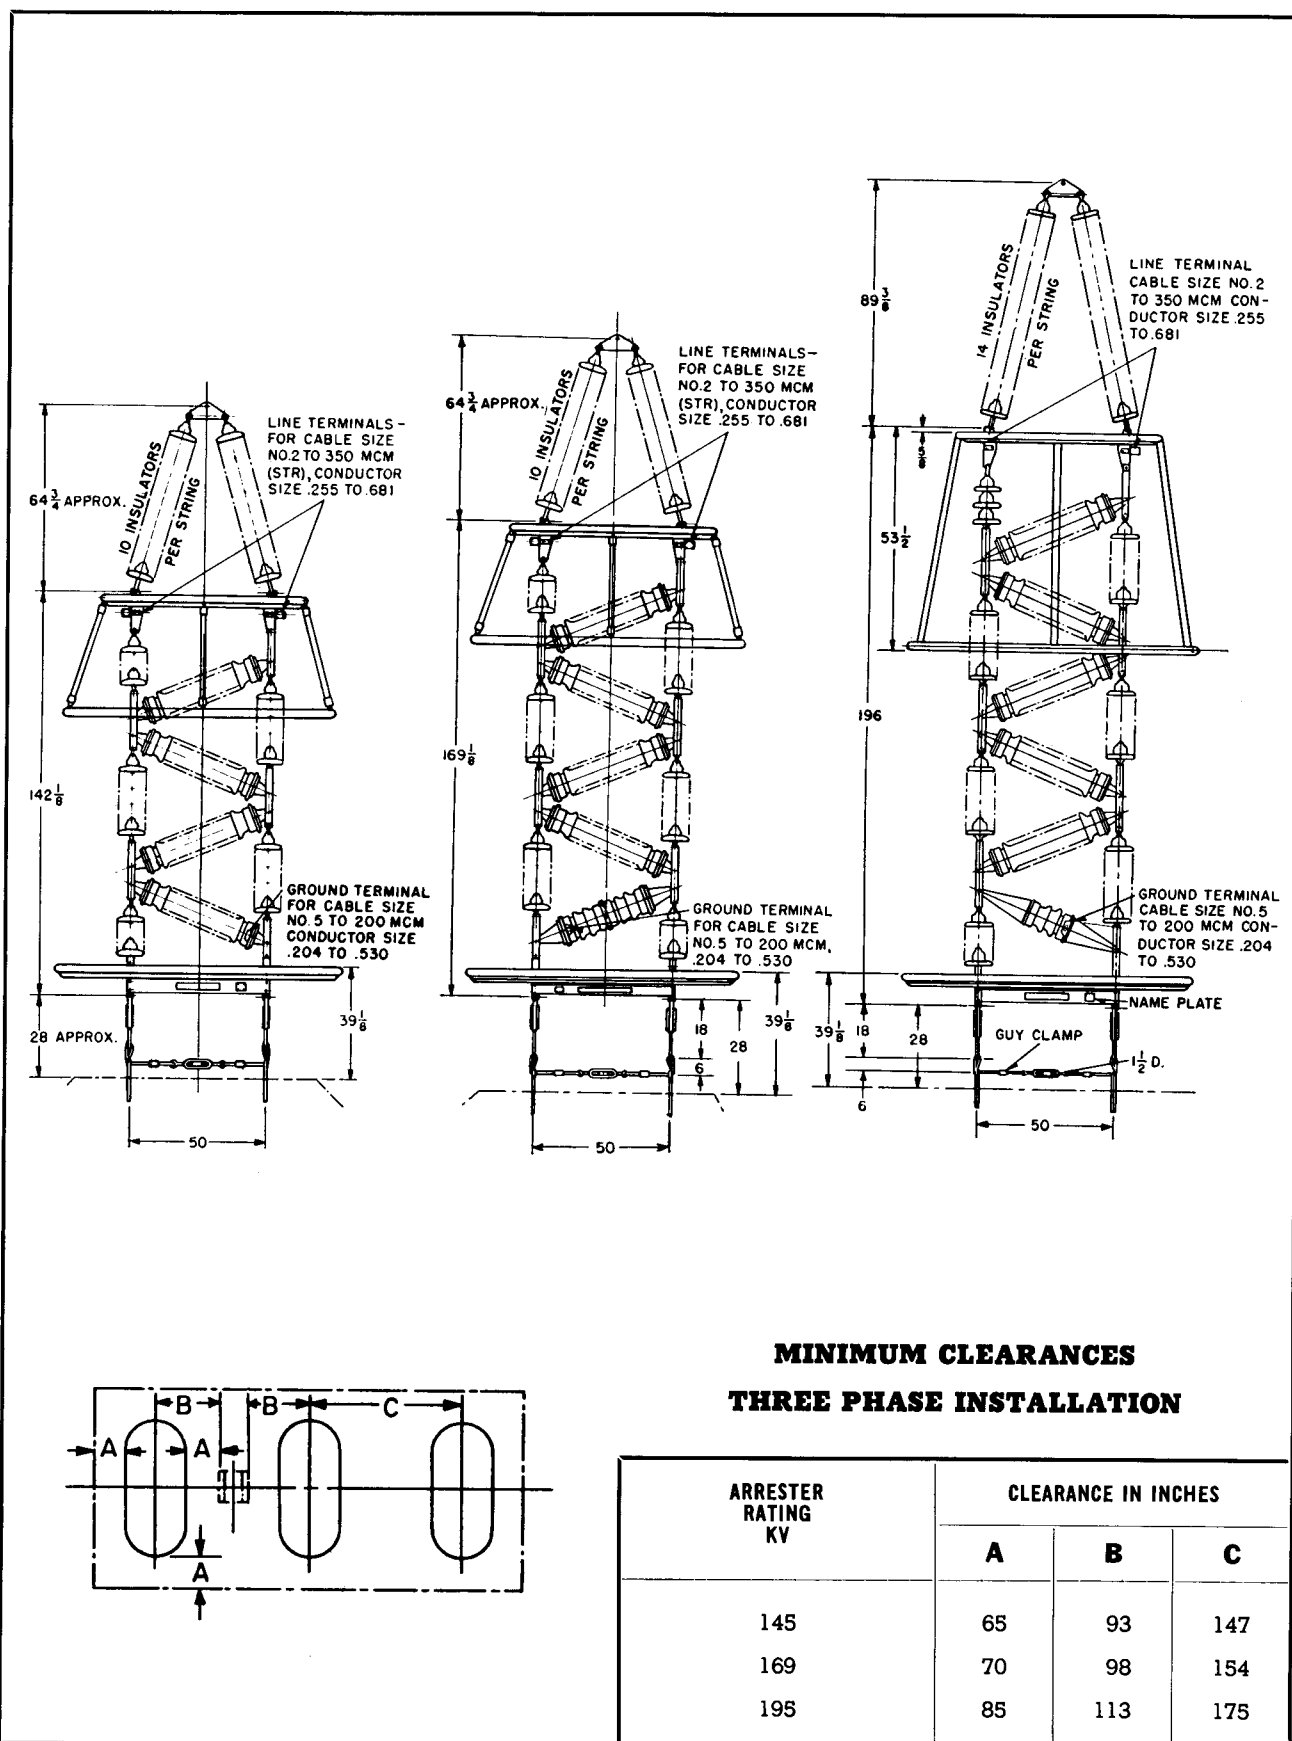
Outline Dimensions and Clearances for Type SV Suspended Arresters.
